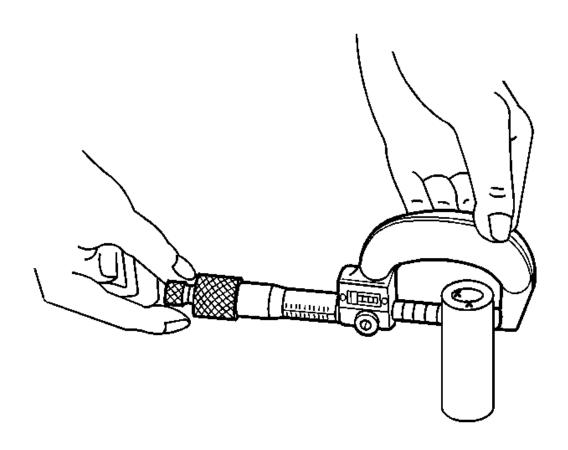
Measuring Piston Pin Diameter Courtesy of GENERAL MOTORS CORP.
